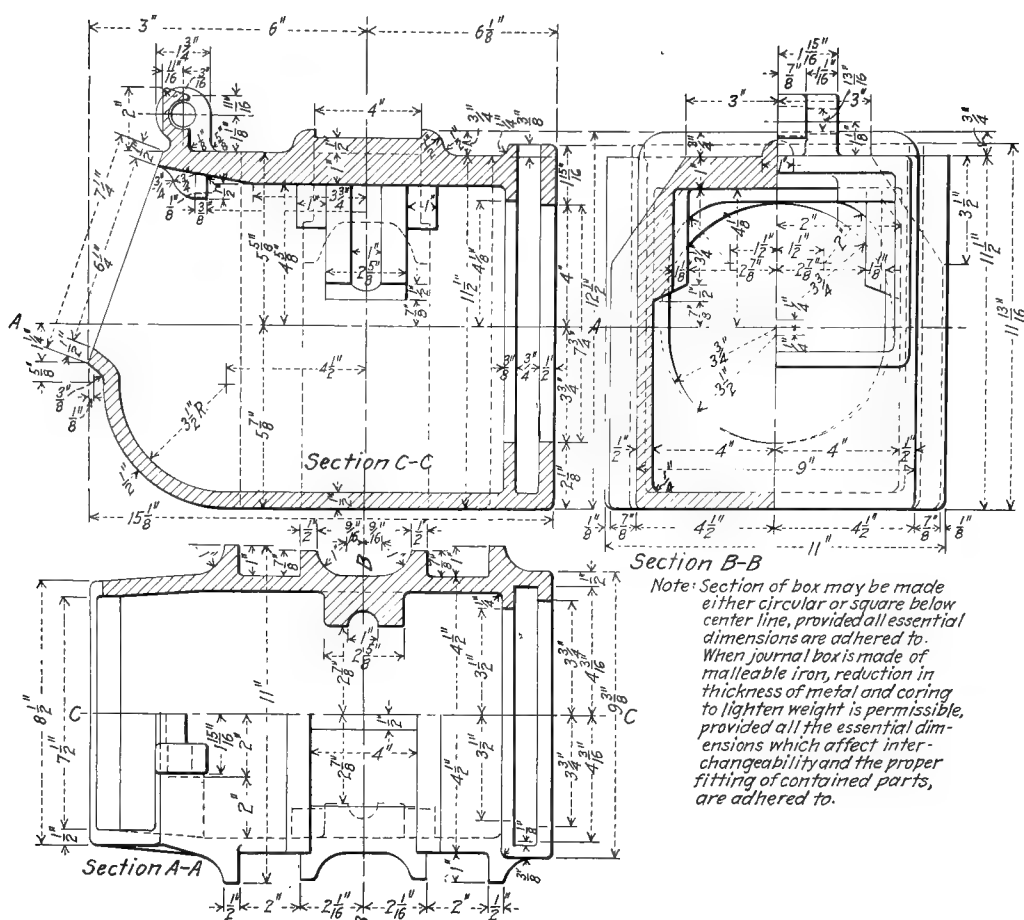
M. C. B. Standard Box for 5 in. by 9 in. Passenger Train Car Journal. (M. C. B. Sheet 8A.)
